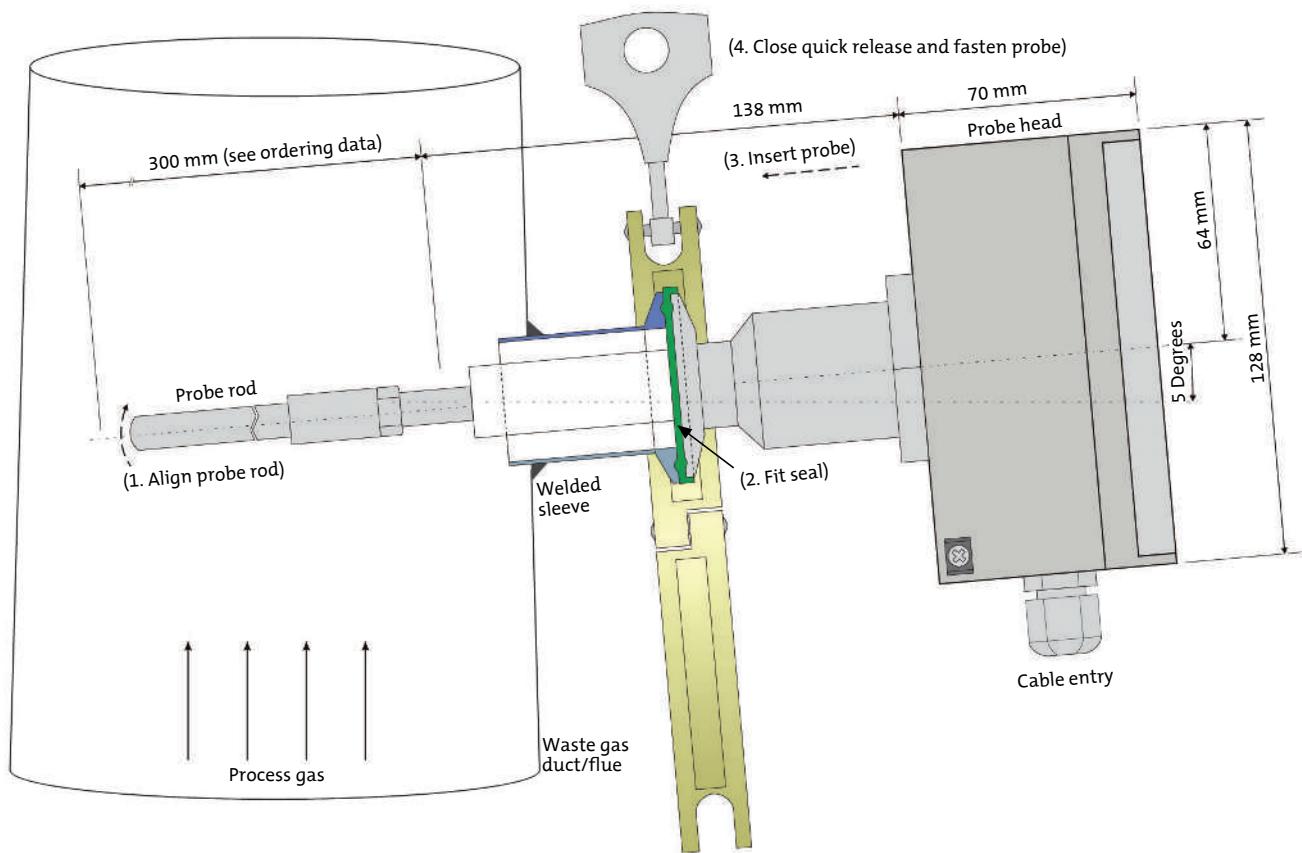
Installation instructions (with fitting - Triclamp quick-release fastener)
